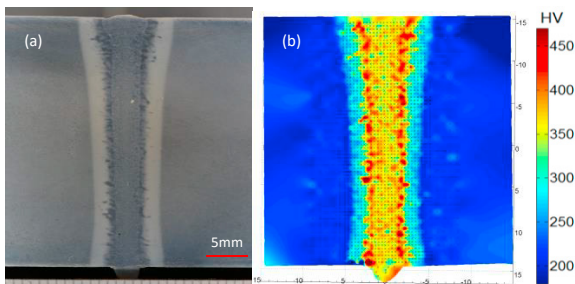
(a) Macrograph of the RPEB weld [23]; (b) Hardness map [6].
